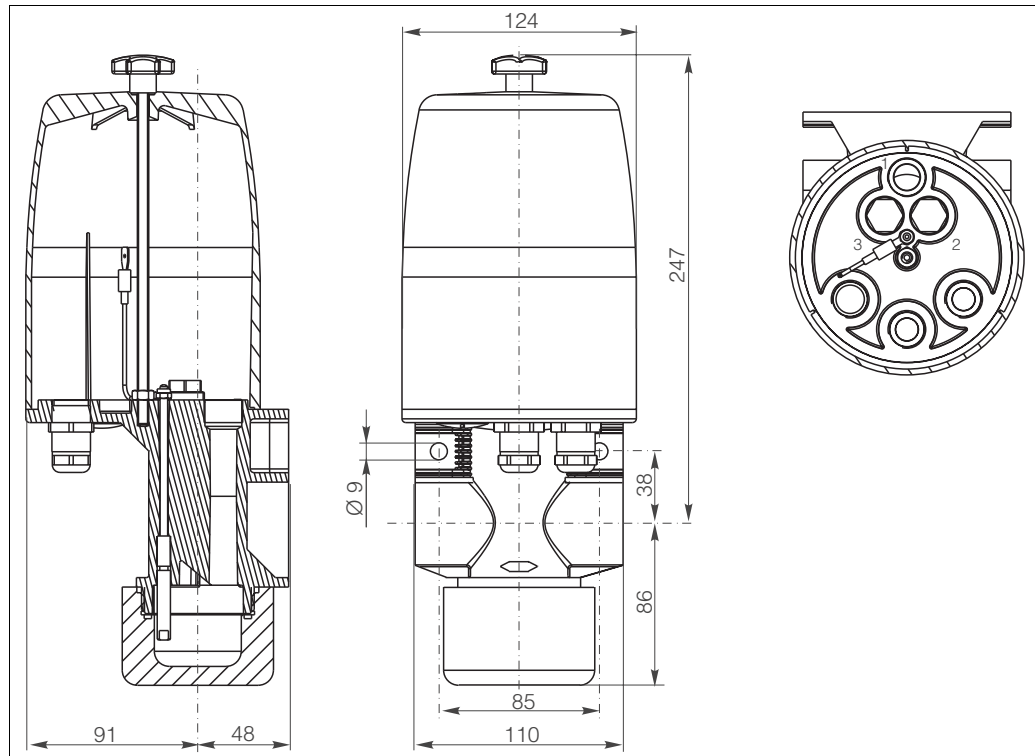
OPA 250-A00 with three electrode mounting places, material PP, with connection thread G 1
